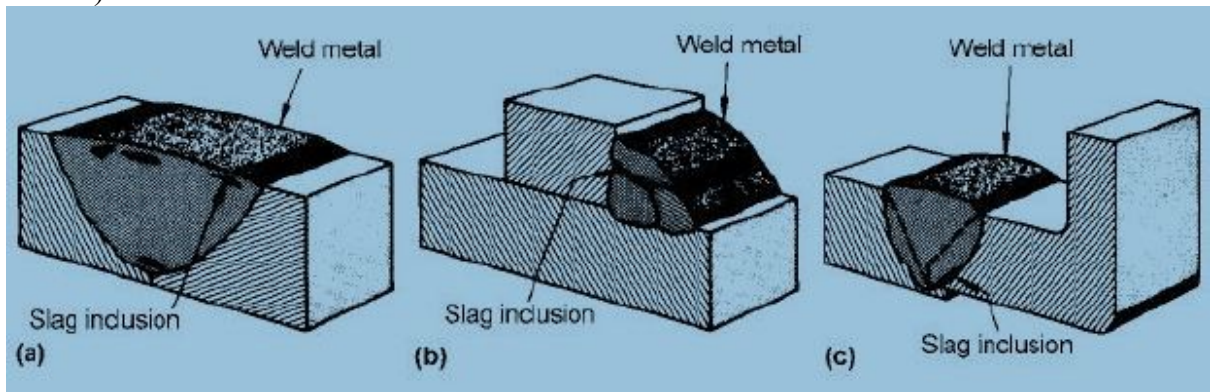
Location of slag inclusion in weld metal (a) near the surface and in the root of a single pass weld (b) between weld beads in a multipass weld and(c) at the side of a weld near the root. (Campbell 2010, 117.)
